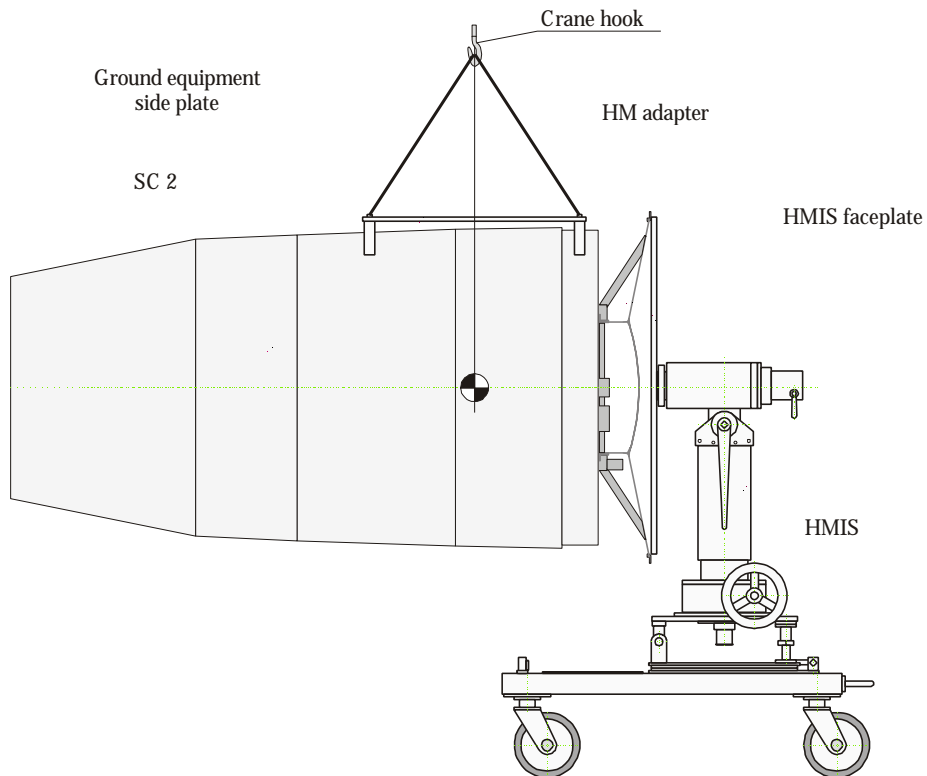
Transfer of spacecraft 2 with adapter to HMIS by crane
